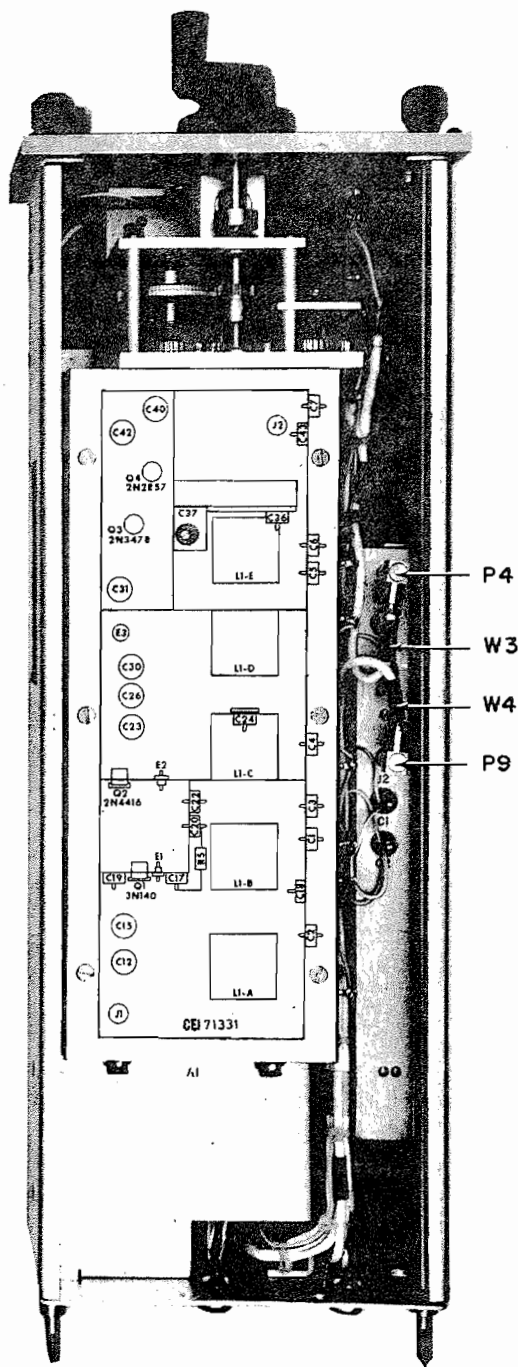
Type VH-101 Tuning Head, Bottom View
